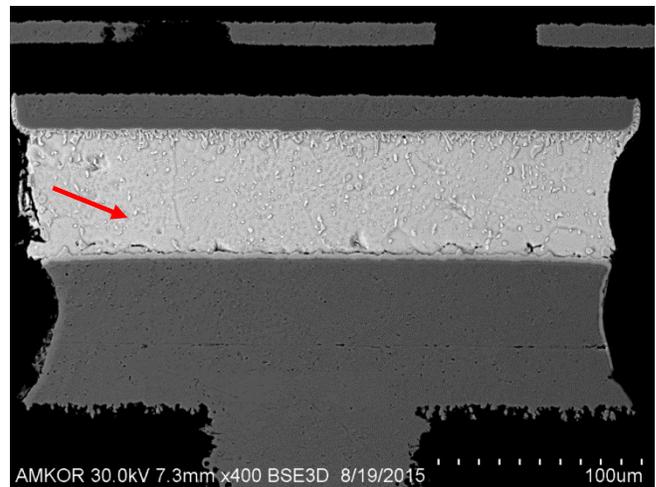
Worst case solder joint on failed unit showing some damage near intermetallic layer on PCB side of joint
